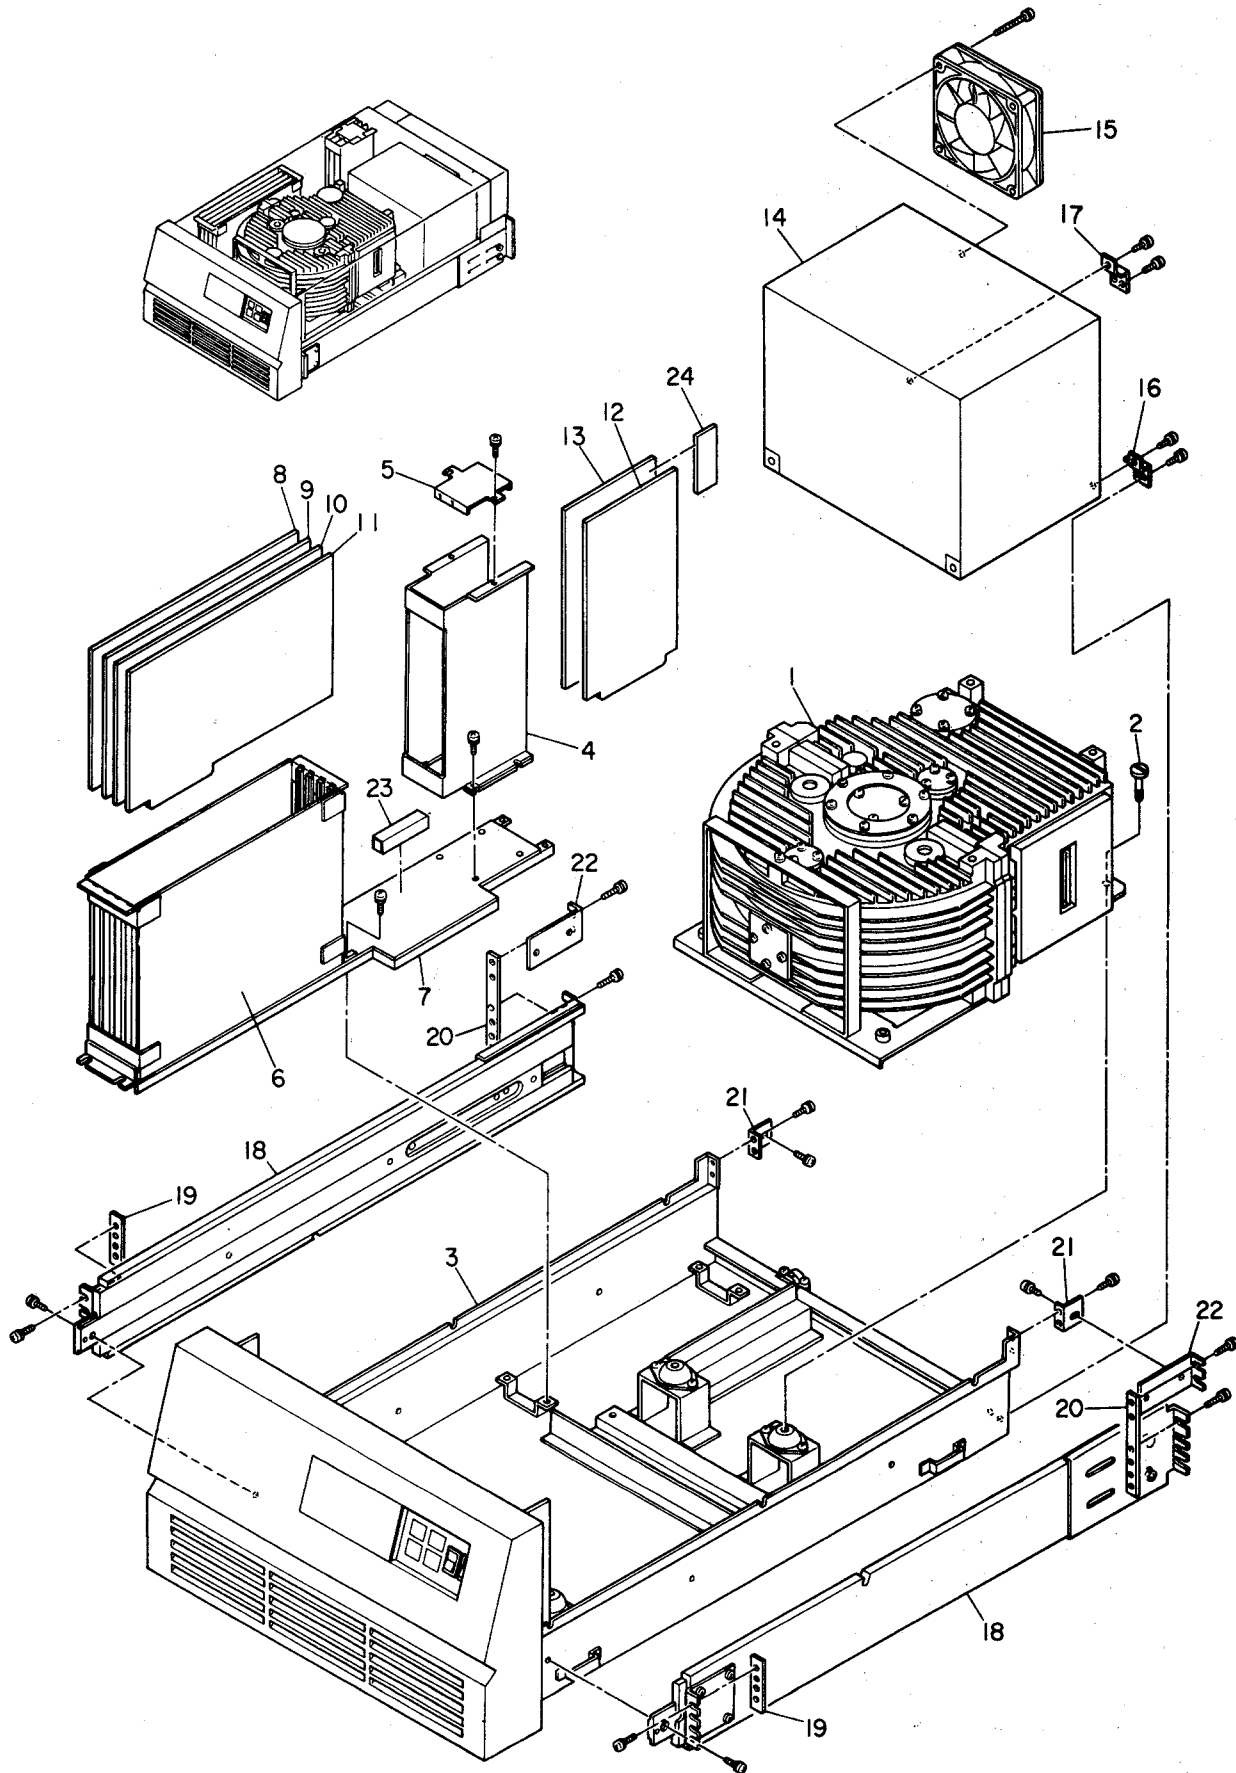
DE, CARD CAGE & POWER SUPPLY - continued
